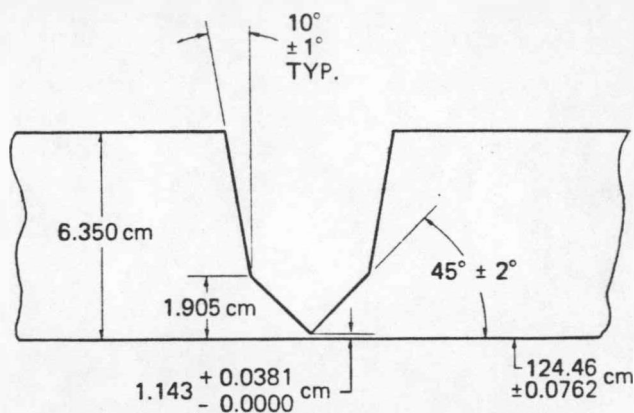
TYPICAL SHELL WELD CONFIGURATION
